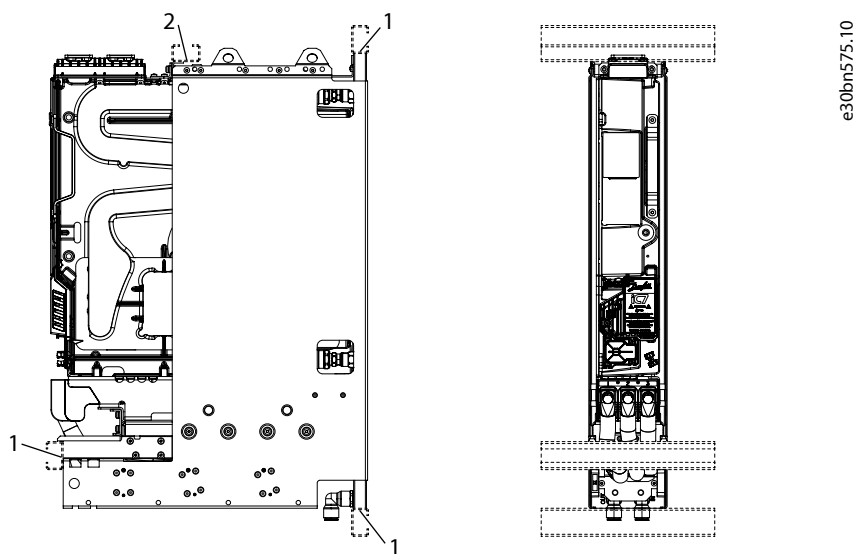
Mounting Holes of the System Module with Short Integration Unit (+AE01)
